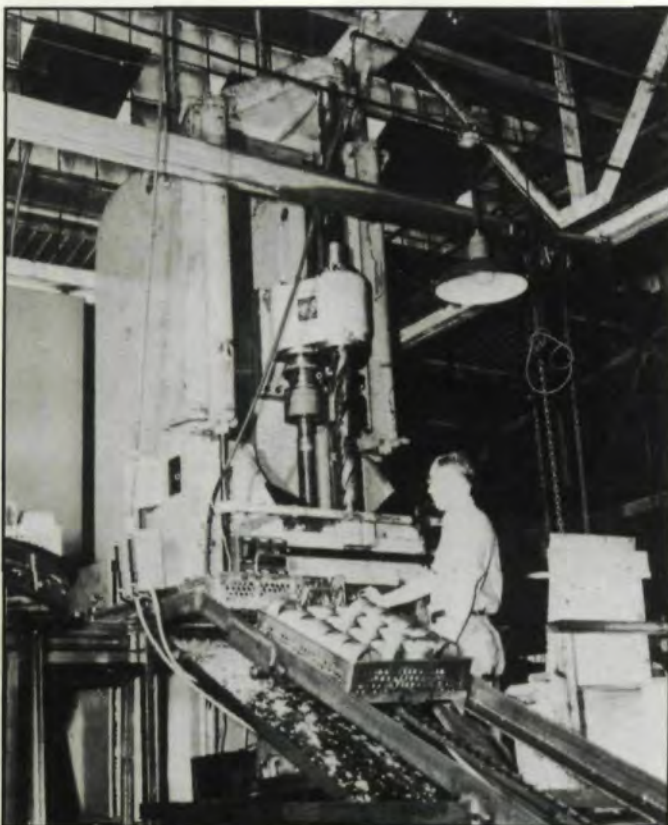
Full-form finish broaching of internal helical gears two-at-a-time on a vertical broach.
